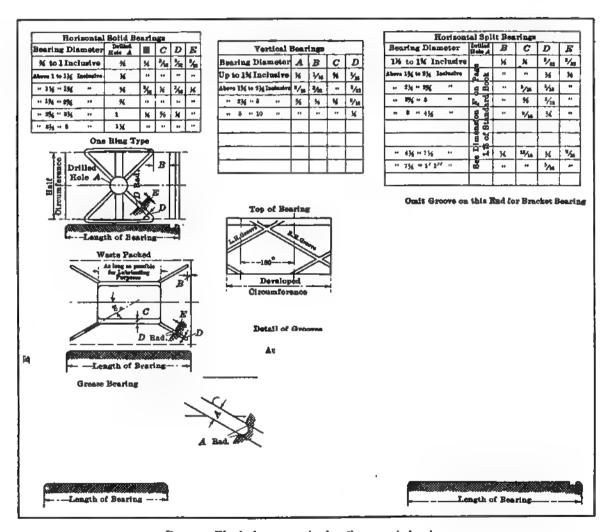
Westinghouse practice for oil grooves in bearings.
